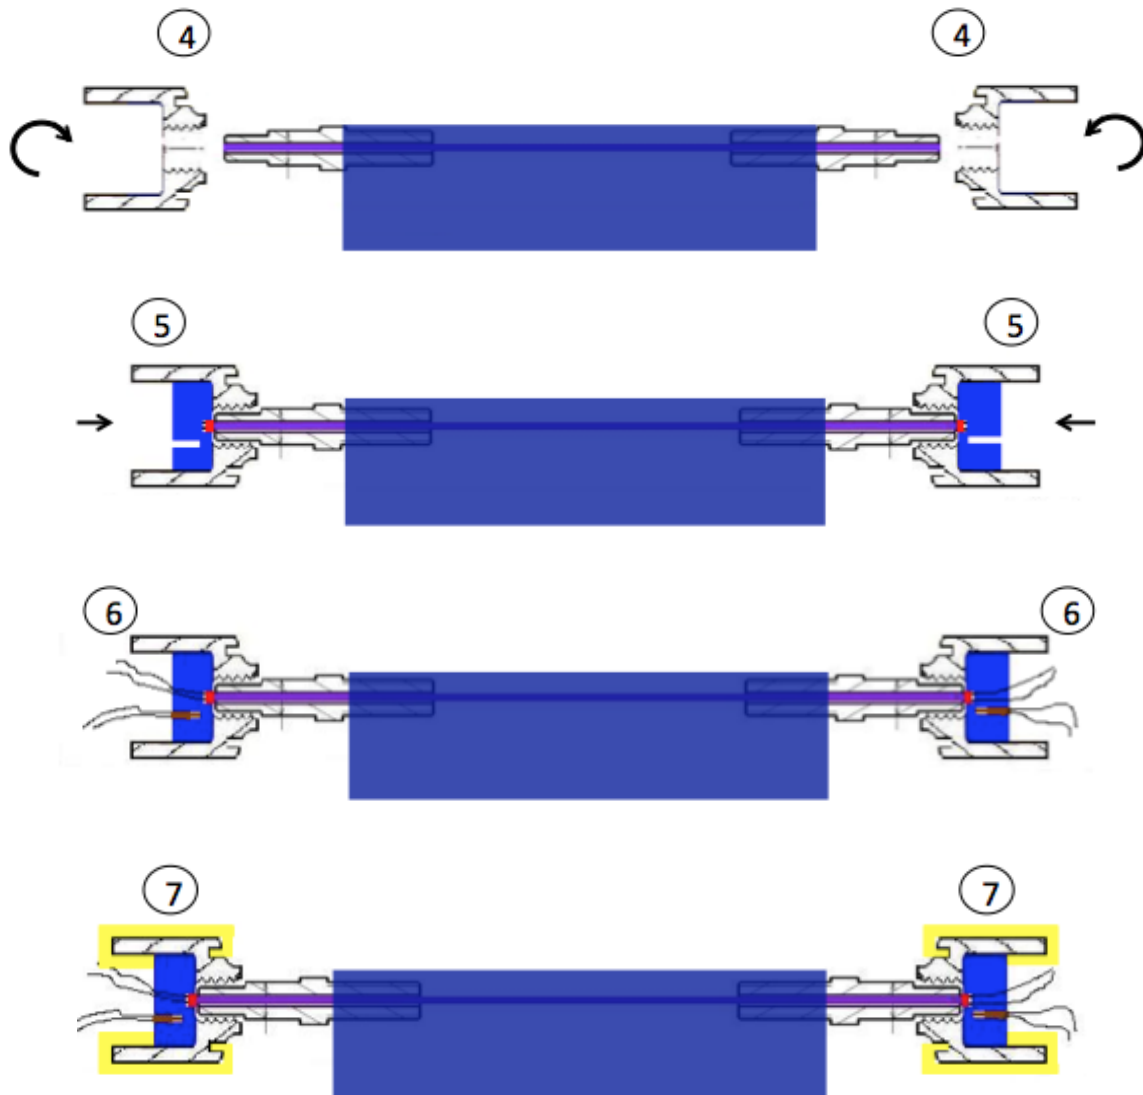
Assembly sequences: Fitting the SiPM connectors:
